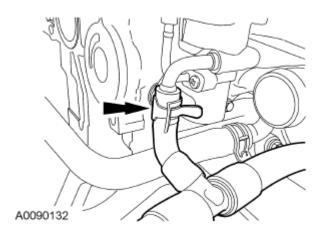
Locating Bolt And KS Courtesy of FORD MOTOR CO.
